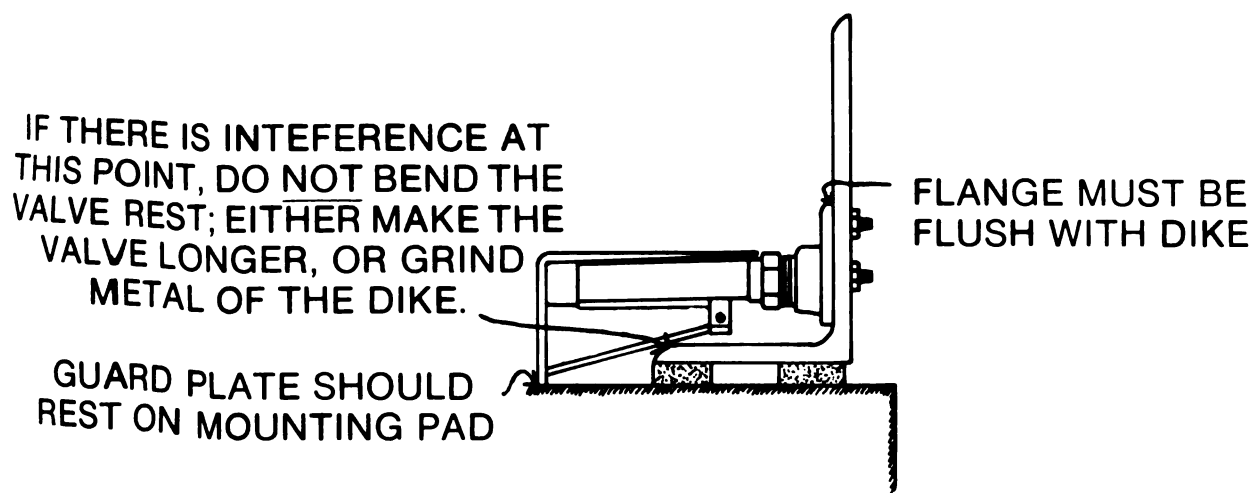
Fitting of drain valve and flange into inside of dike.
